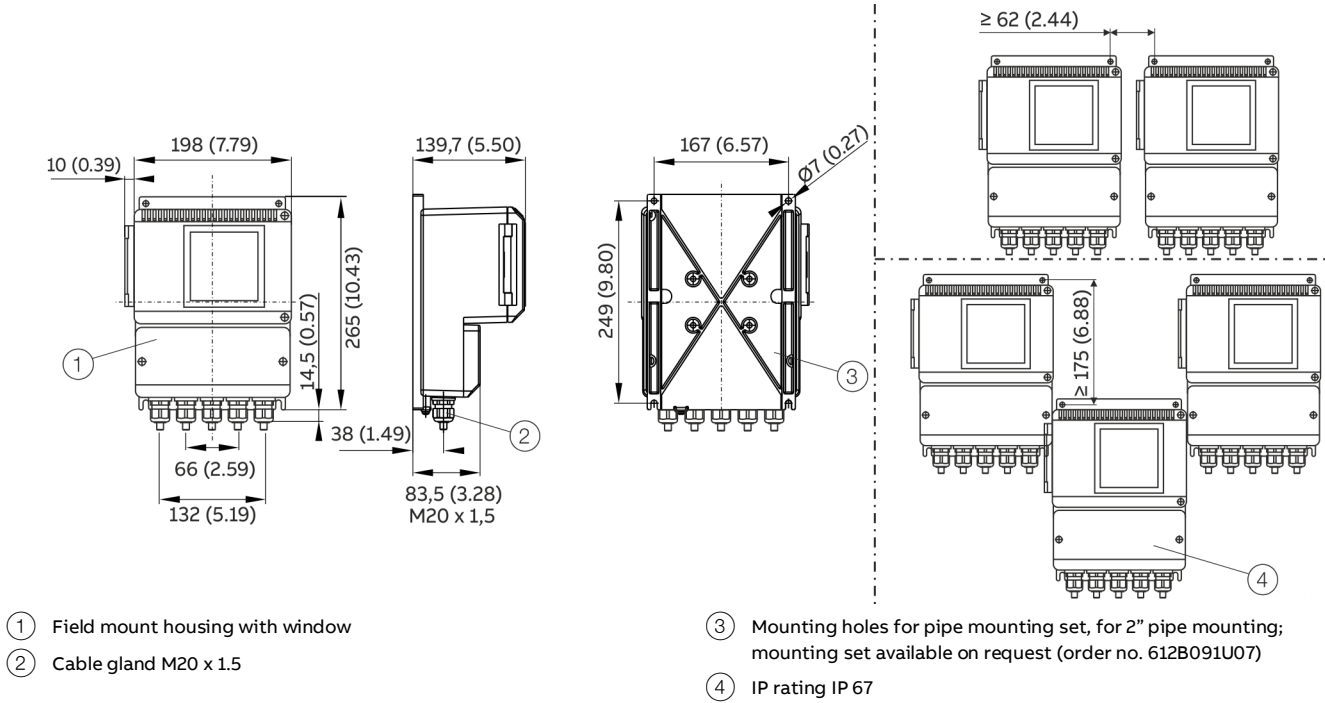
Dimensions transmitter housing – dimensions in mm (inch)
